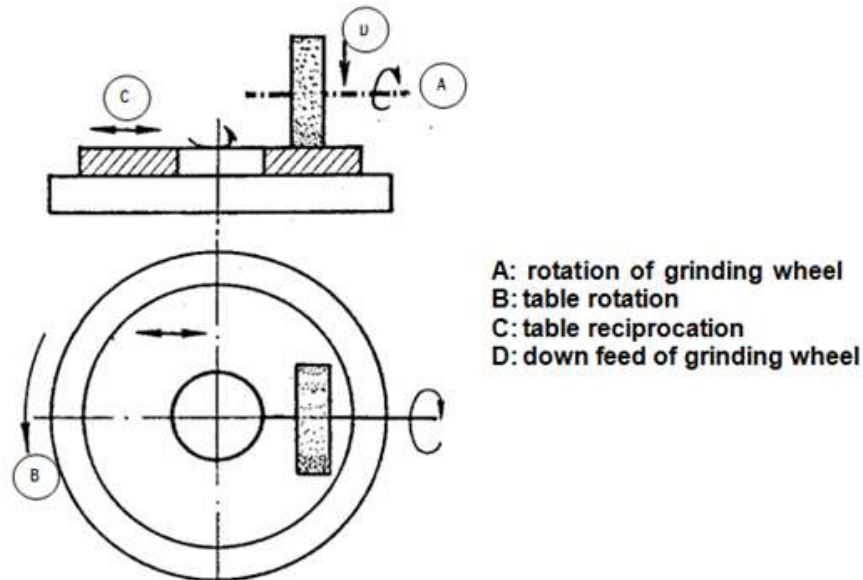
Surface grinding in Horizontal spindle rotary table surface grinder
